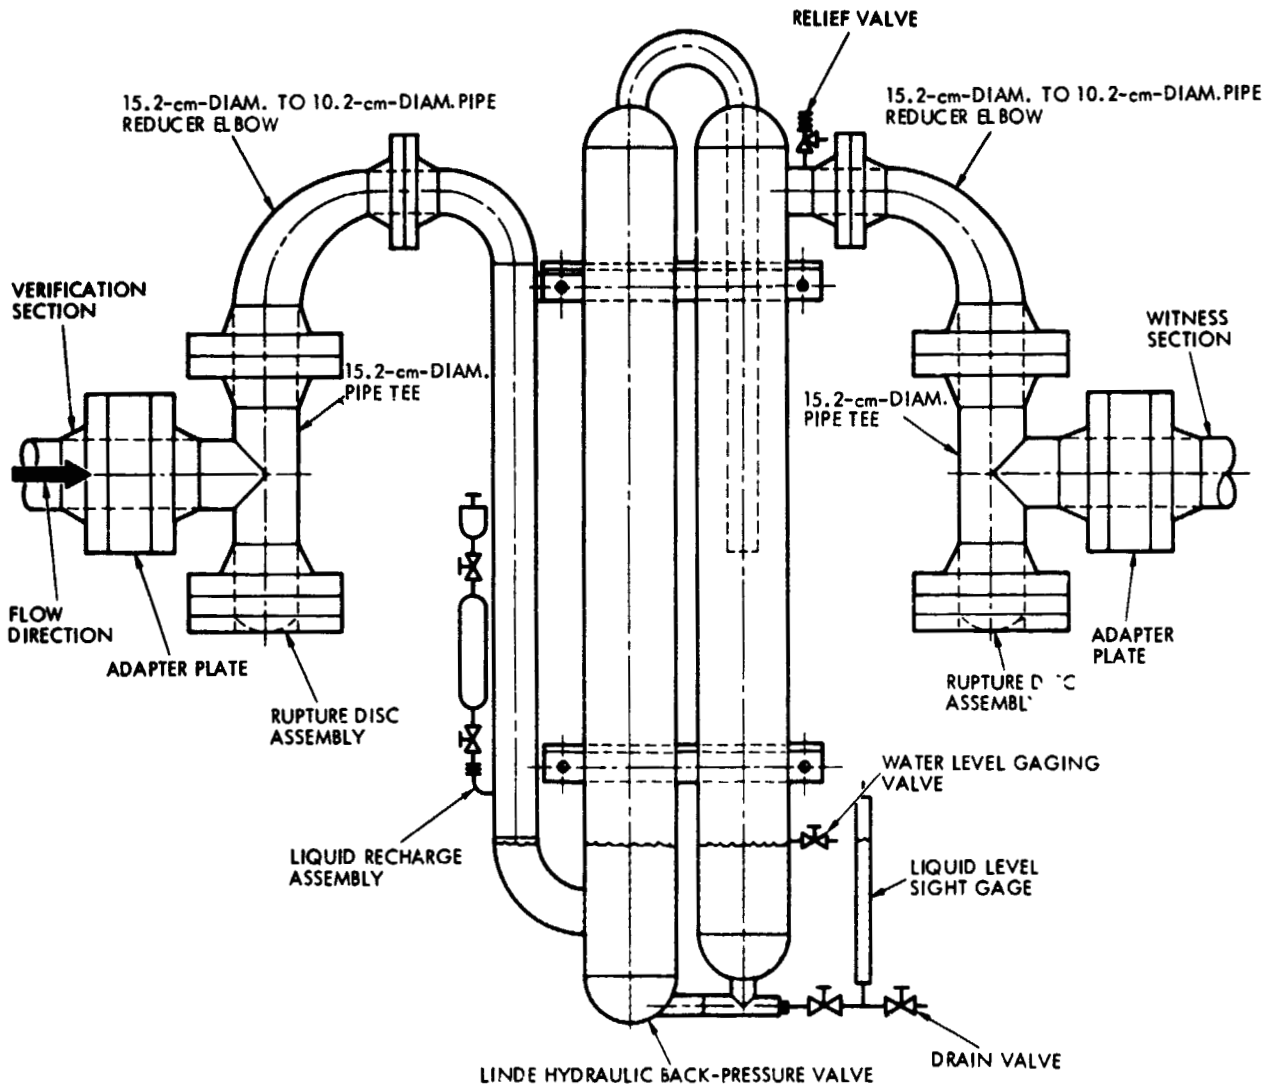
Linde Hydraulic Back-Pressure Valve Arrester Test Assembly Schematic Drawing
